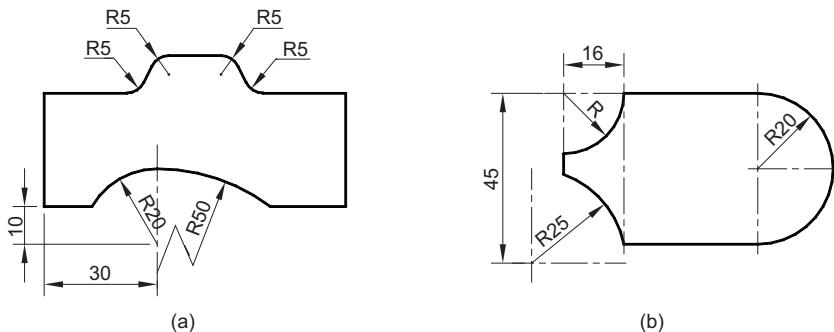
(a) and (b) Methods of radius dimensioning
